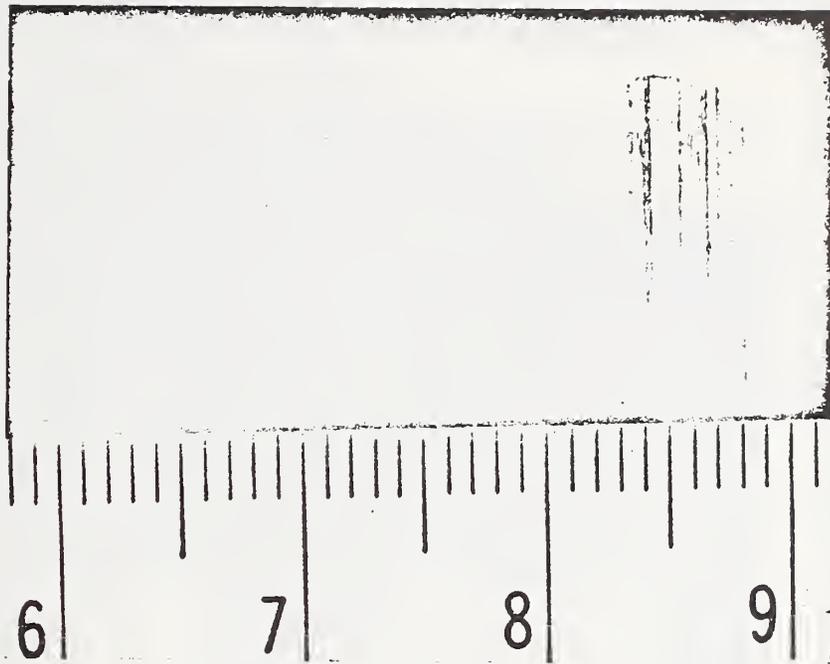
Fracture surface of the compliance calibration specimen. (Scale in cm)
